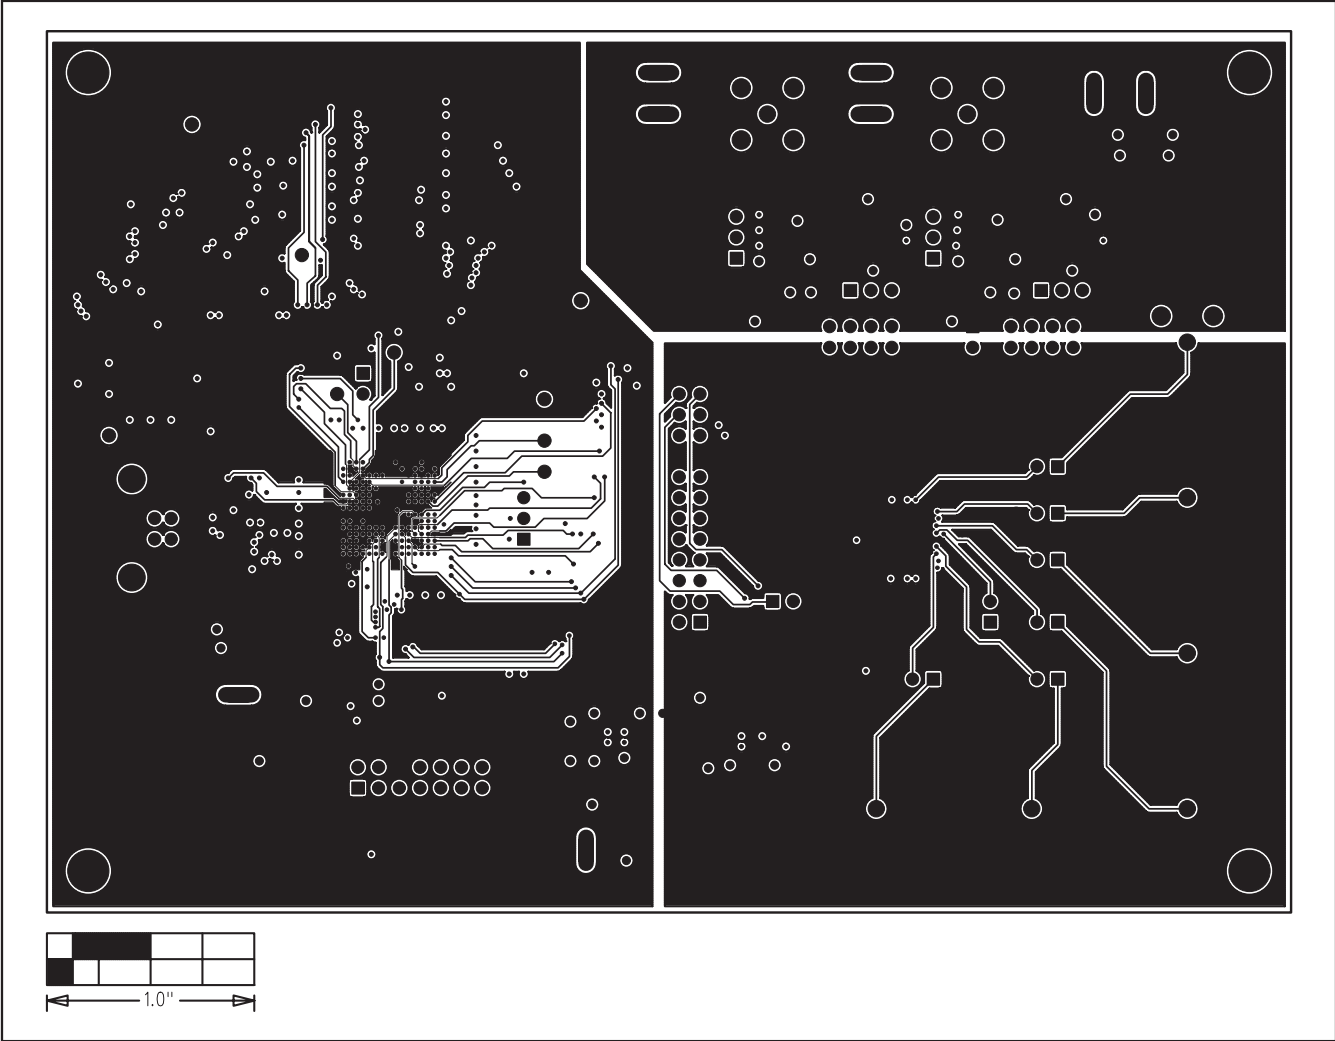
MAX11046 EV Kit PCB Layout—Inner Layer 3 (Power)
